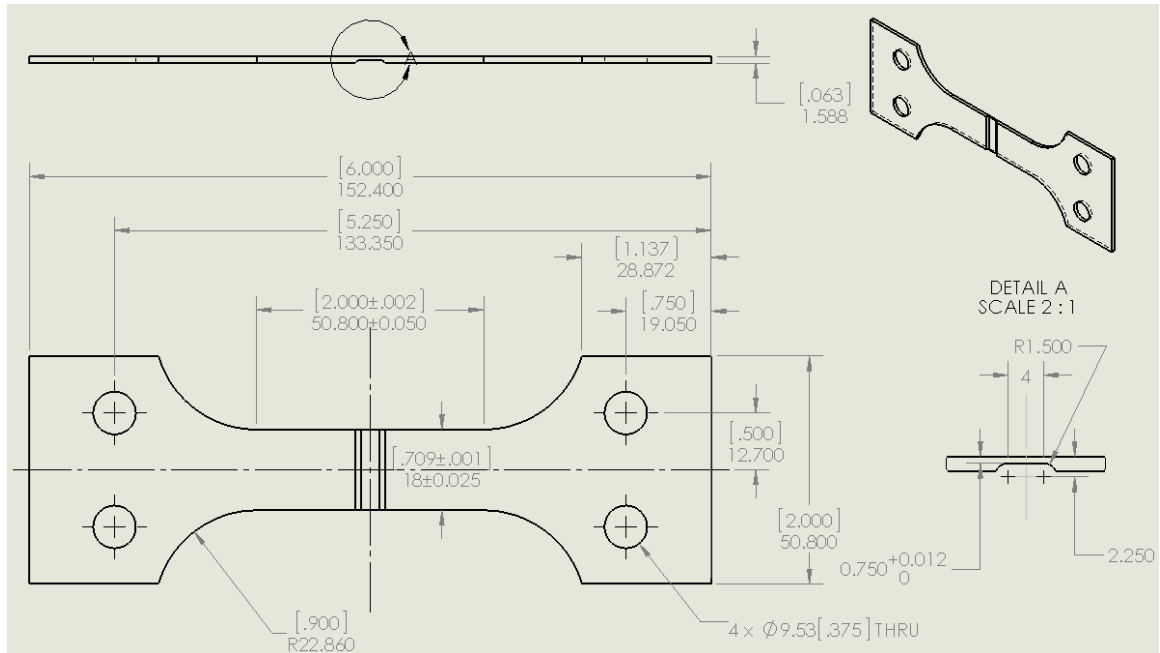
Technical drawing of the 18mm-width specimen with 4mm groove (Courtesy of James Gose and Haocheng Pan).
